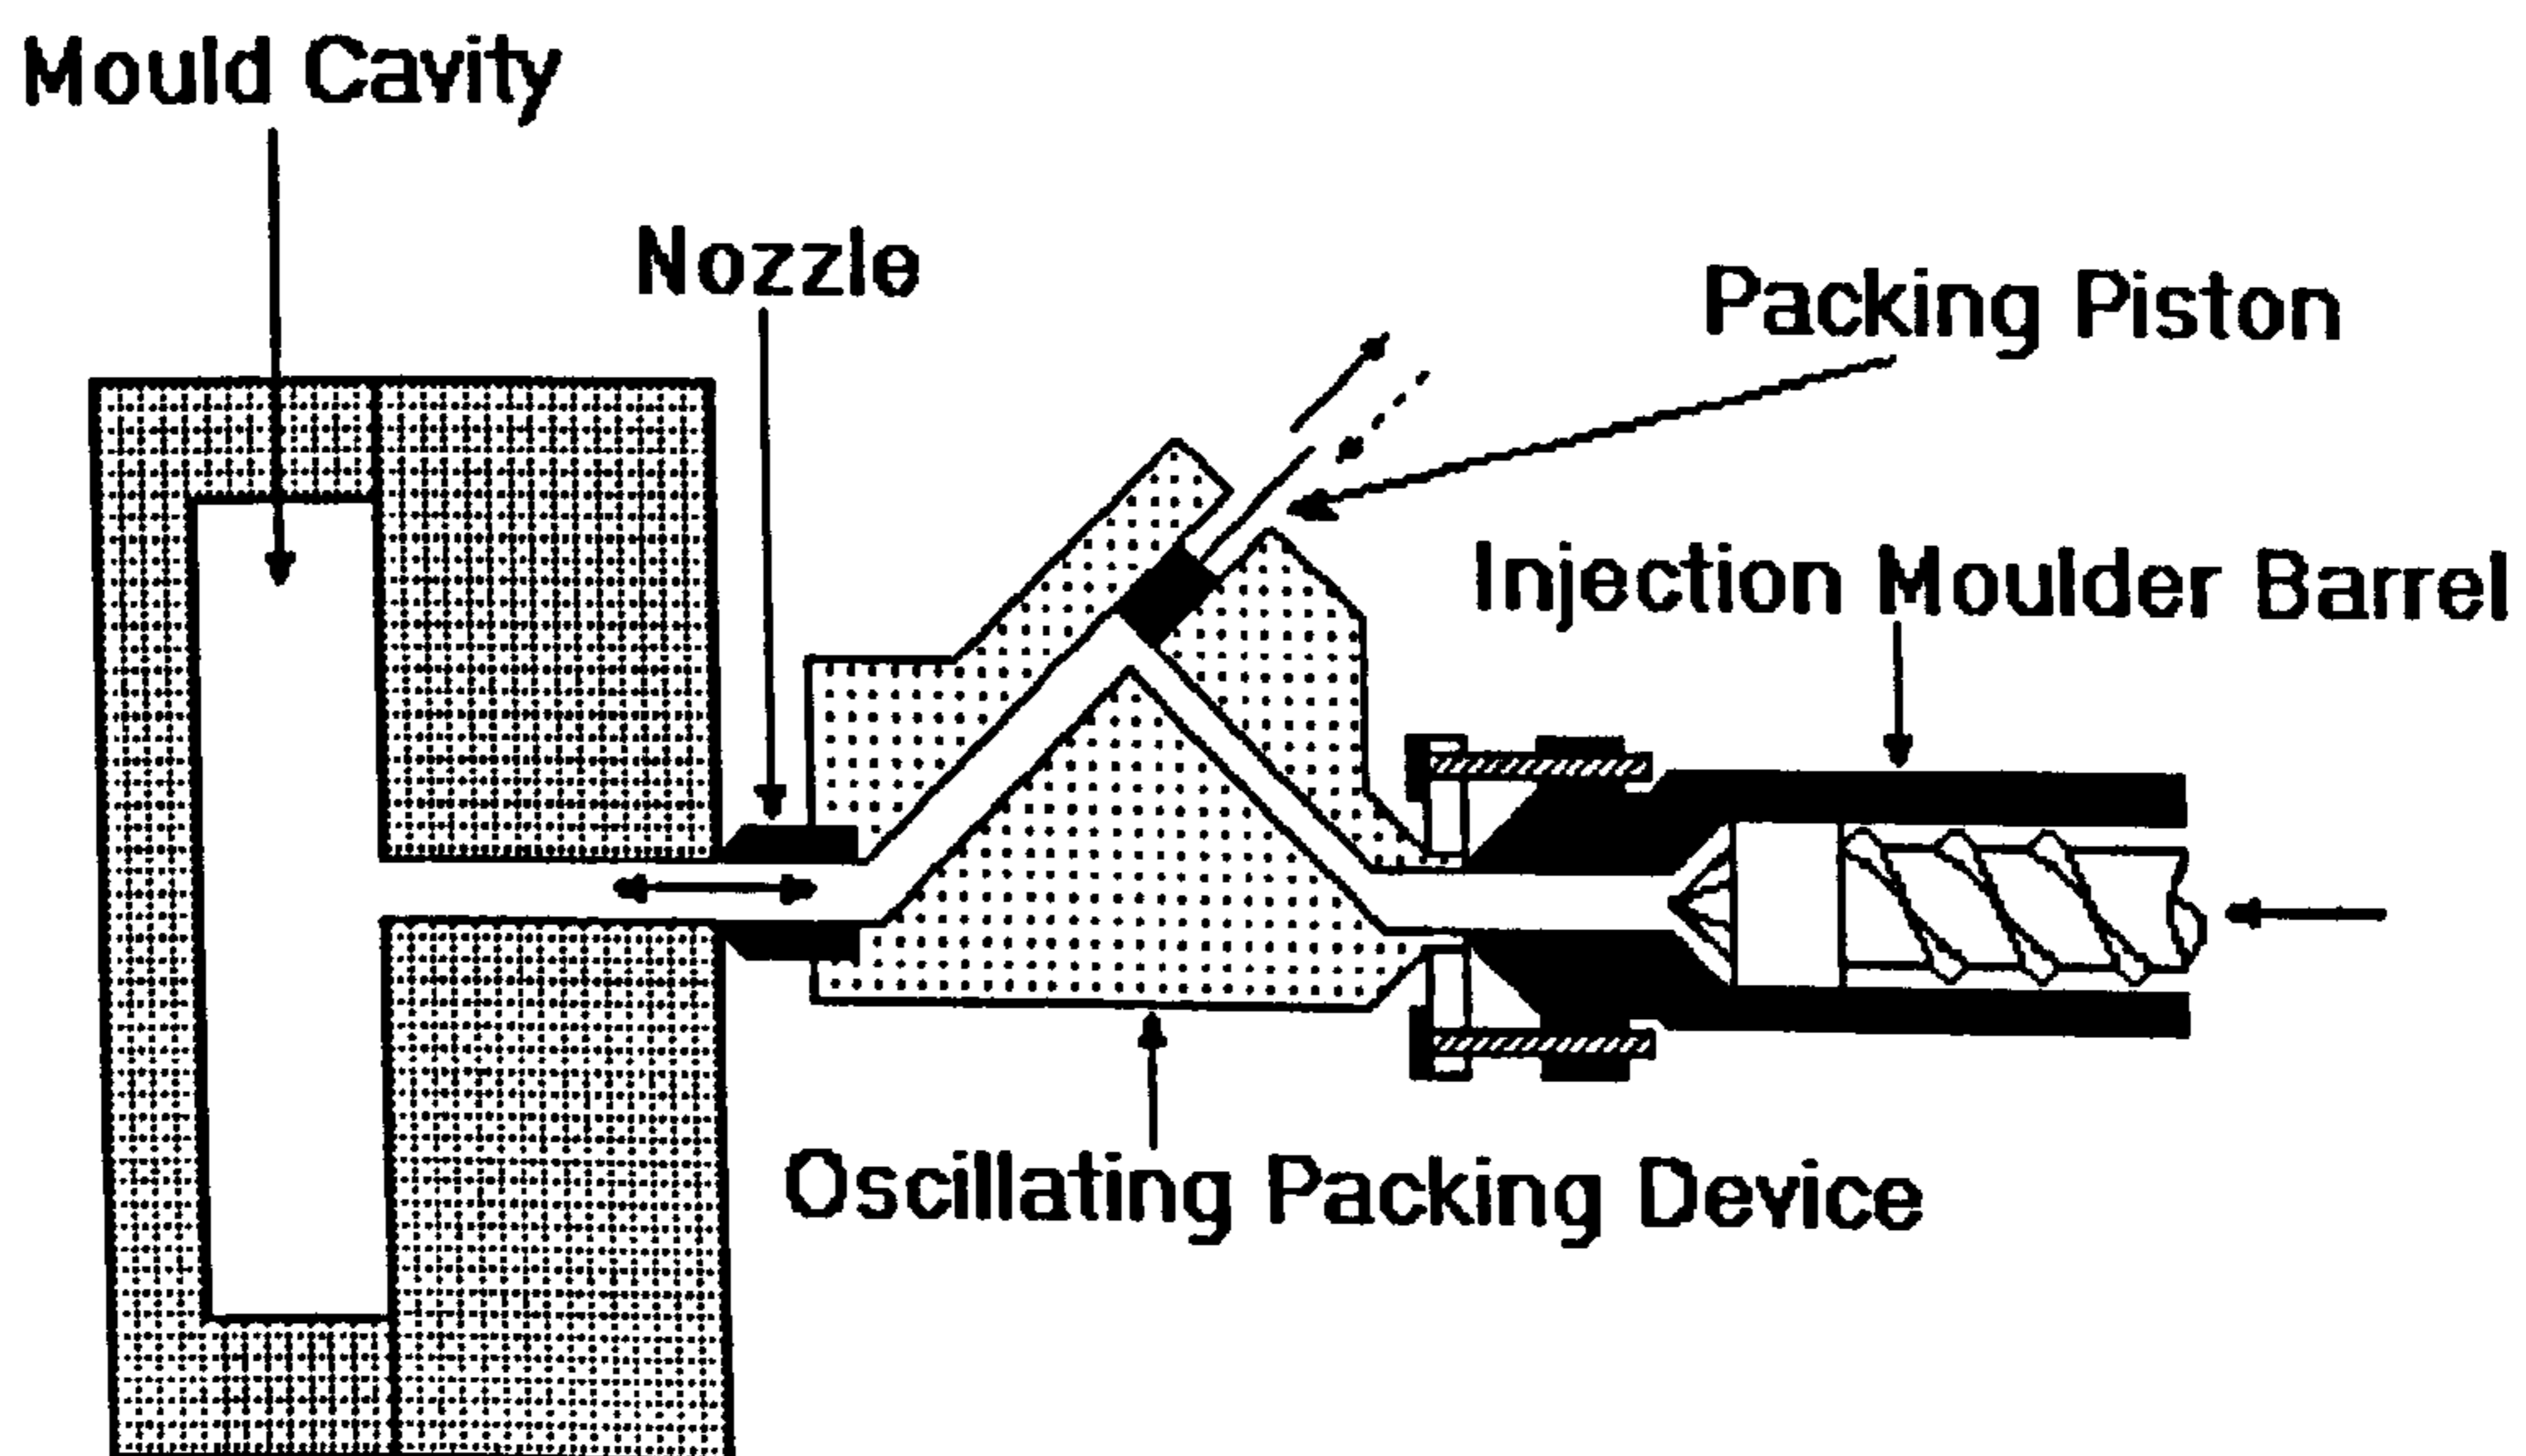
Schematic diagram of oscillating packing device in position between die cavity and moulder injection unit⁷⁷.
